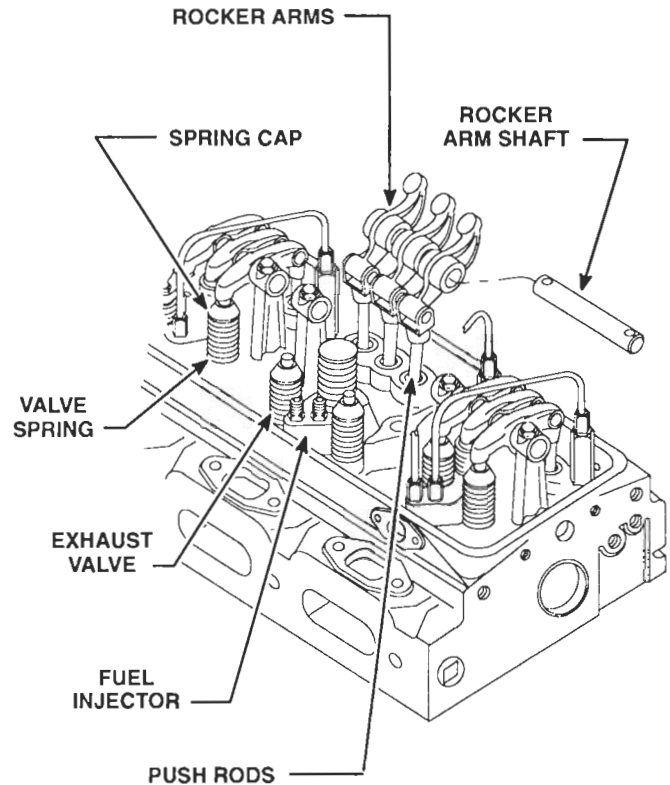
Location of Exhaust Valves and Guides Two-Valve Cylinder Head
